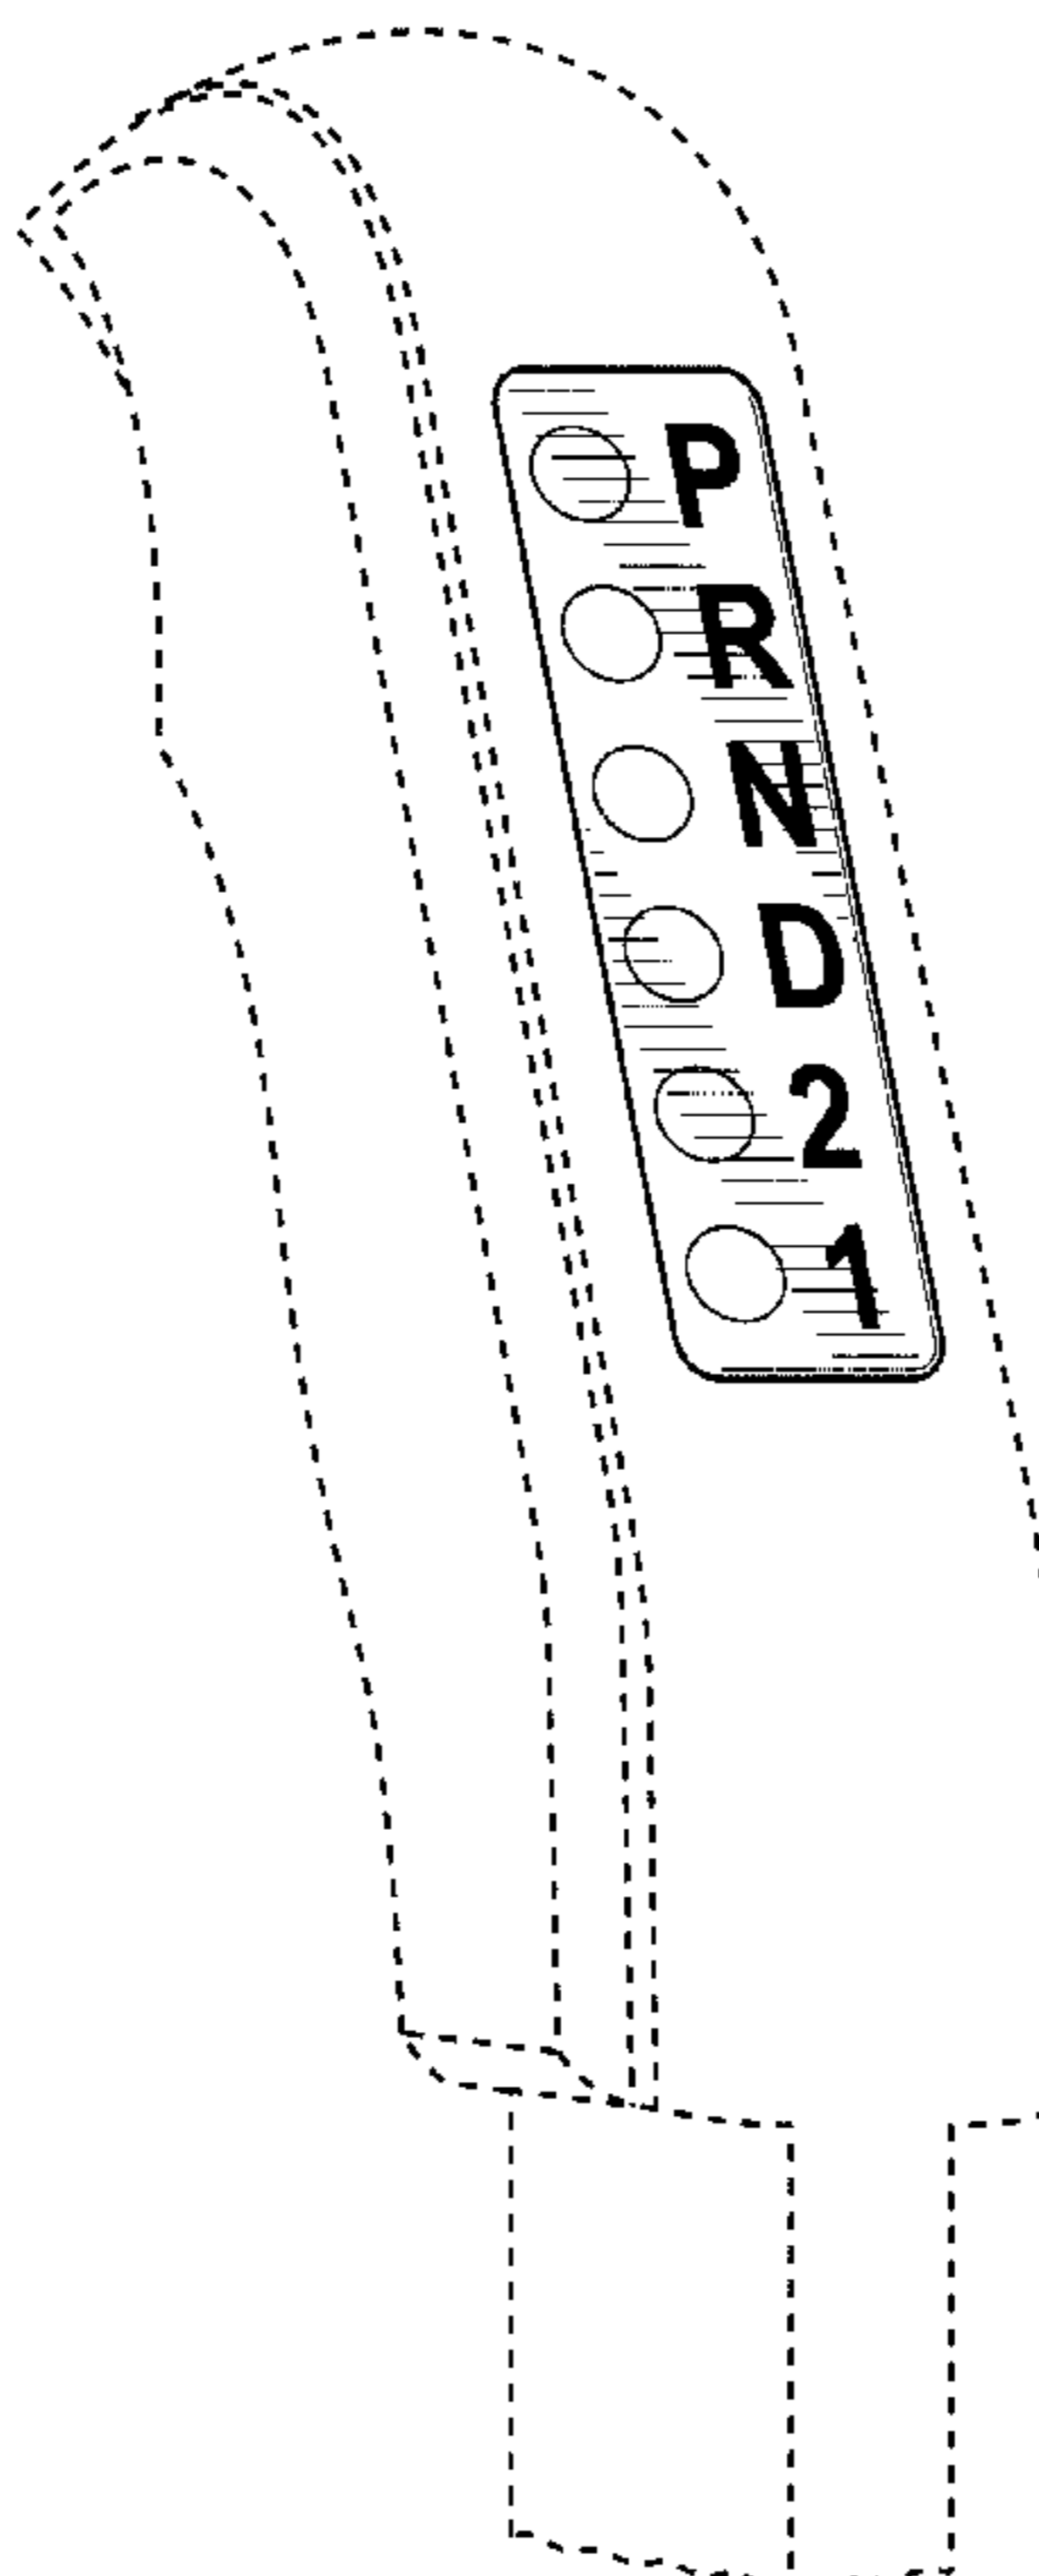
is a front elevational view of a gear shift indicator alternate embodiment, depicted on an unclaimed gear shift lever shown in dashed line;
